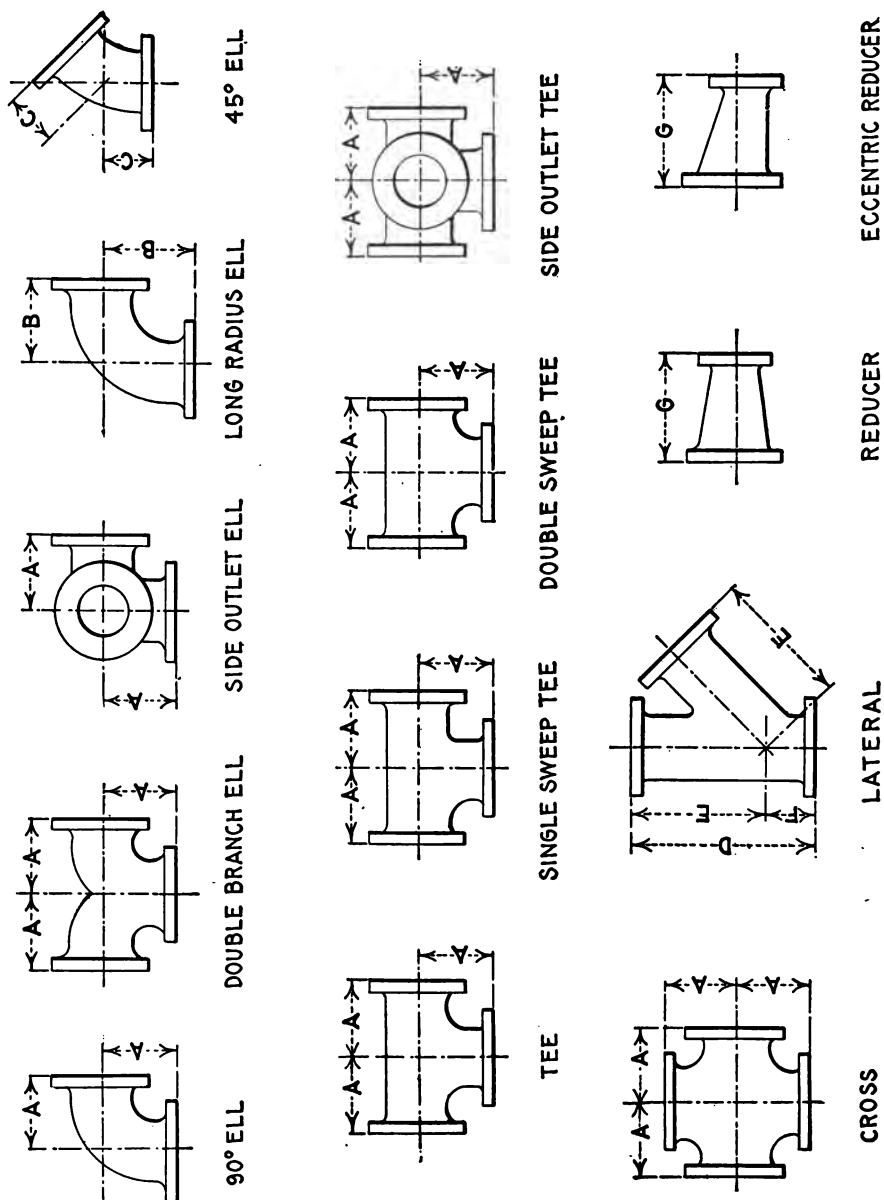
STANDARD TYPES OF FLANGE FITTINGS DIMENSIONED IN TABLES 16 AND 17
